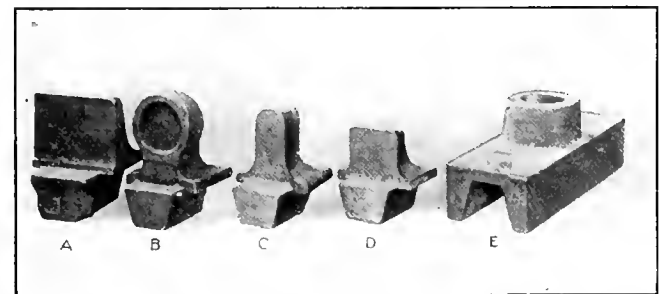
Rough Castings used in making the Two-jawed Chuck.
